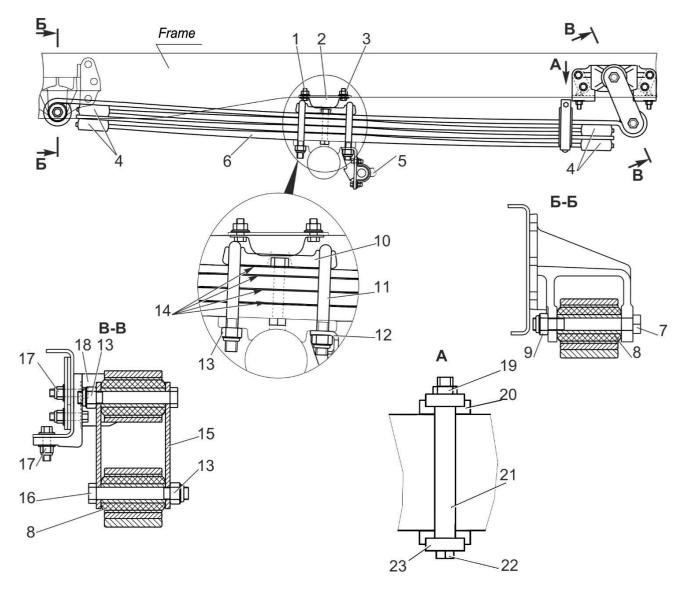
Rear suspension: 1, 7, 16, 22 – bolts; 2 – buffer; 3, 9, 13, 17, 19 – nuts; 4 – gaskets; 5 – stabilizer bar; 6 – dual-rate spring; 8 – silent blocks; 10 – clamp plate; 11 – U-bolt; 12 – bracket; 14 – interleaf spacers; 15 – shackles; 18 – rear spring bracket; 20 – clamp gasket; 21 – distance bushing; 23 – clamp
